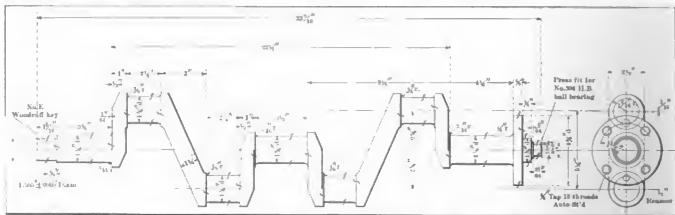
Premier crankshaft, with flange for flywheel, using fine material and shaped for long life in rigorous service
